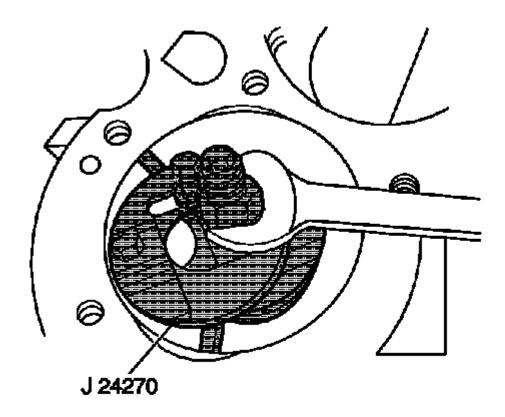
Removing Cylinder Bore Ring Ridge Courtesy of GENERAL MOTORS CORP.
